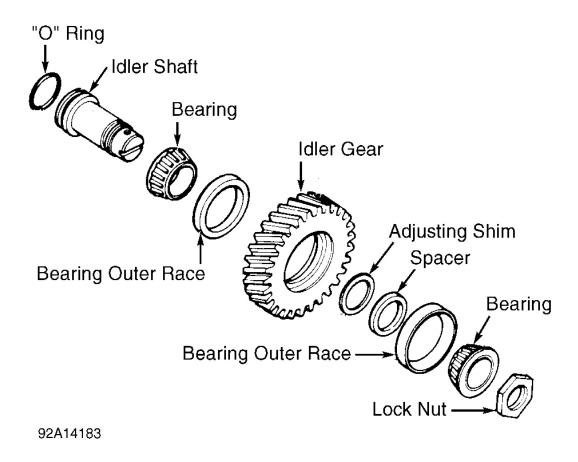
Exploded View Of Idler Gear Assembly Courtesy of FORD MOTOR CO.
